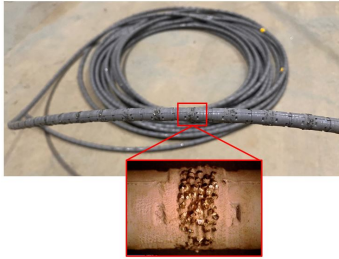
Type of diamond wire used during experiments, with zoom-in on bead segment
